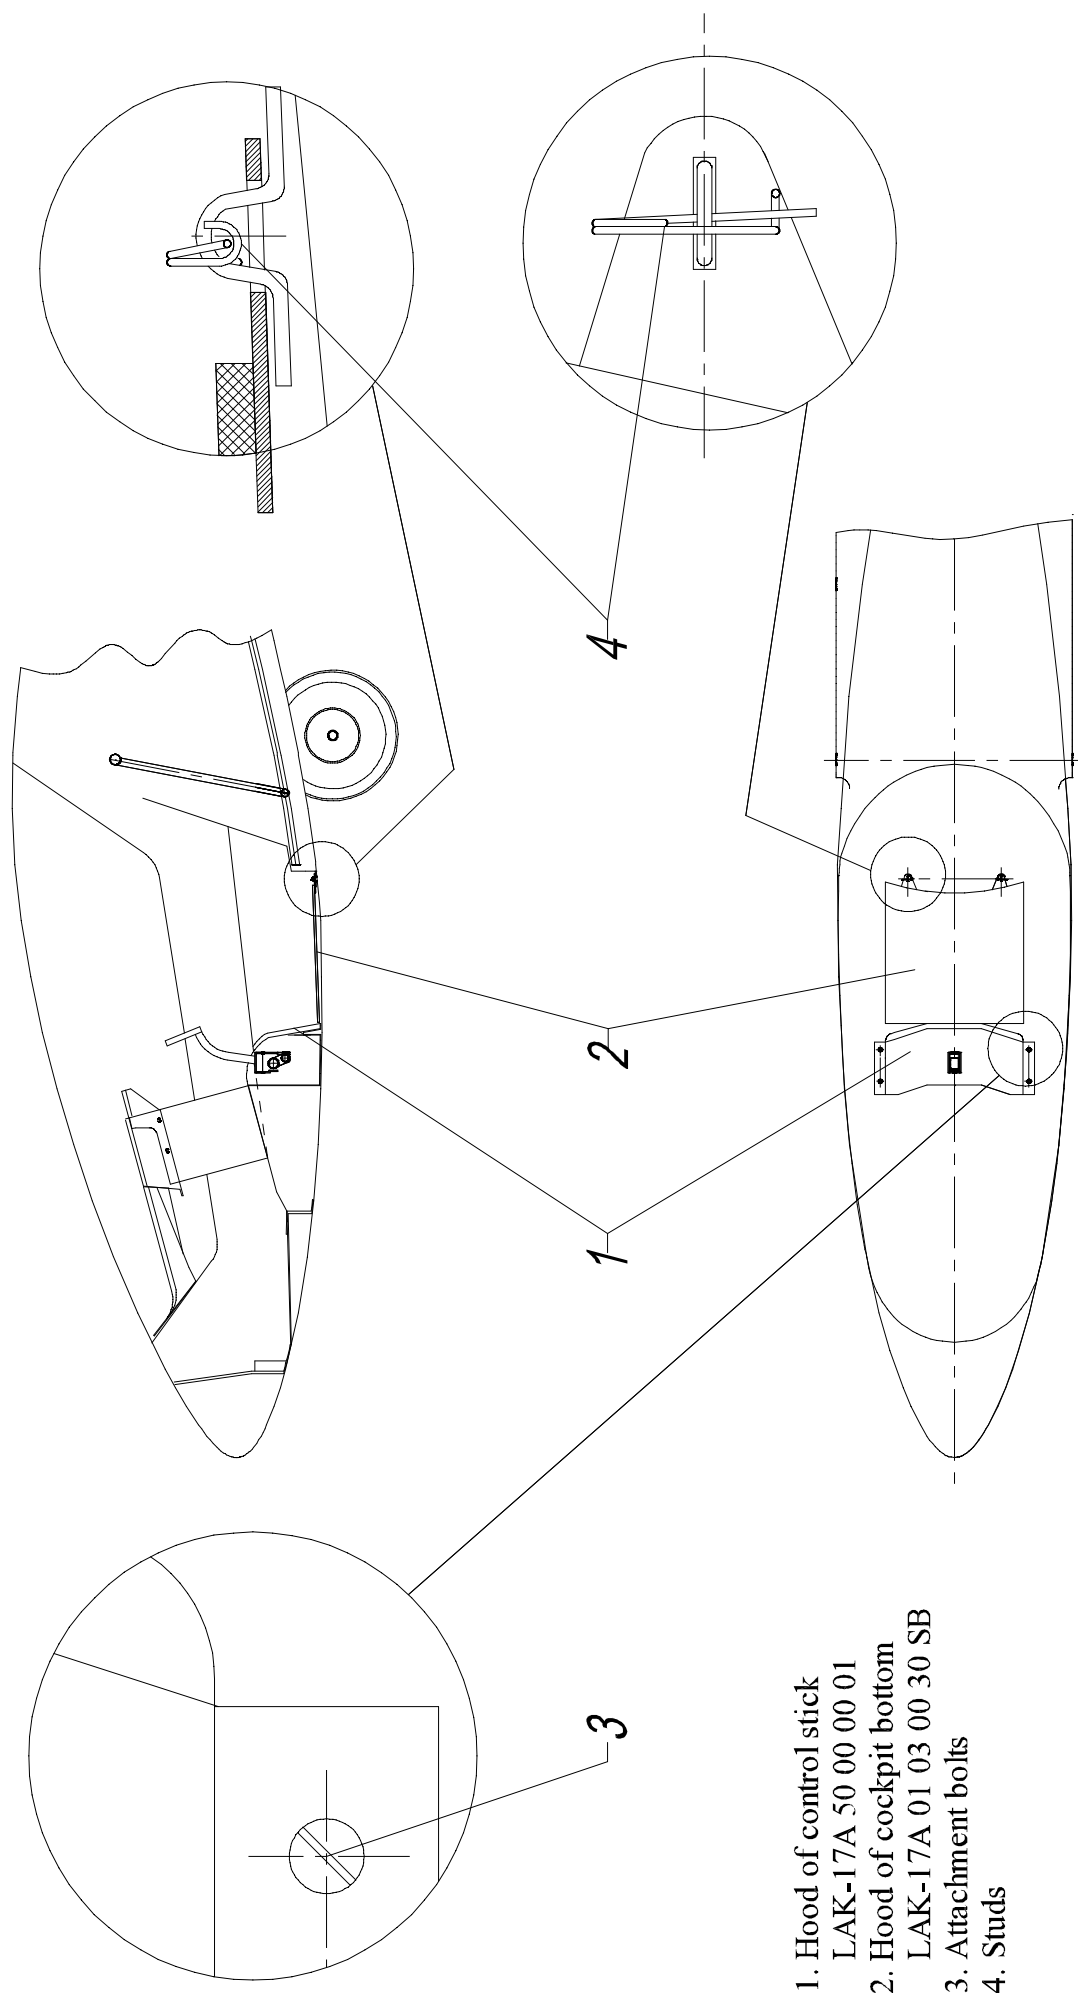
01. Taking out and putting in of cockpit floor
